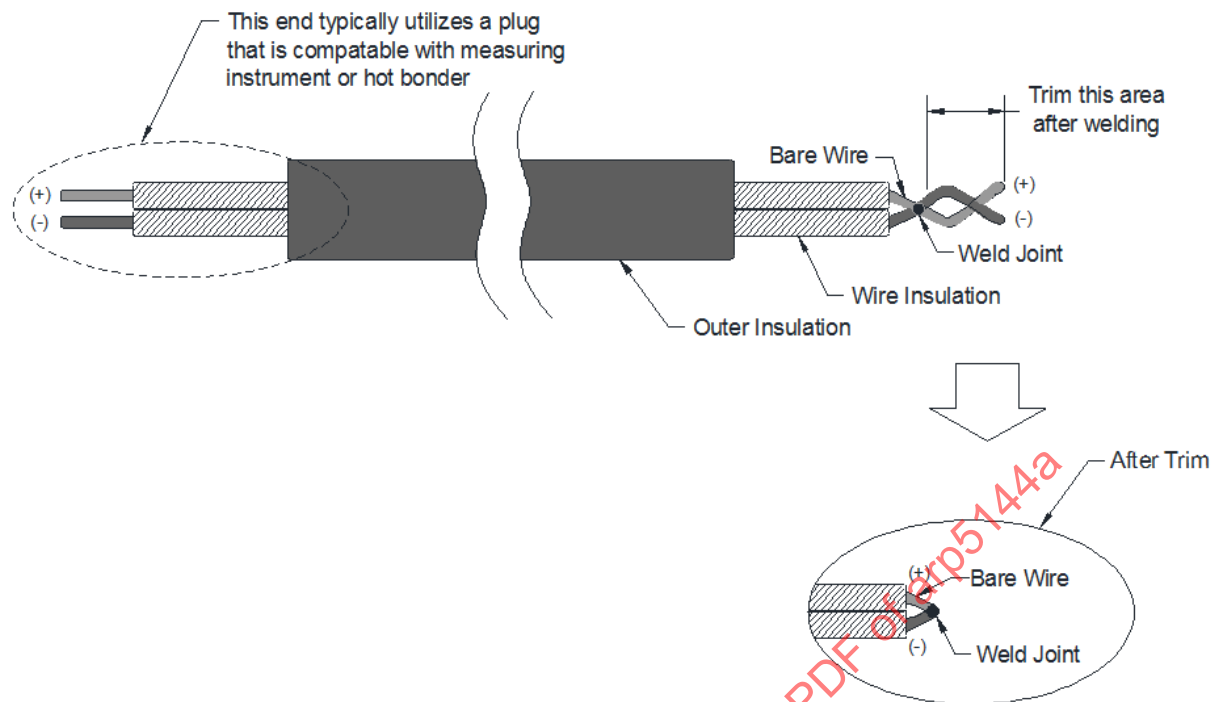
Thermocouple manually twisted before resistance welding
